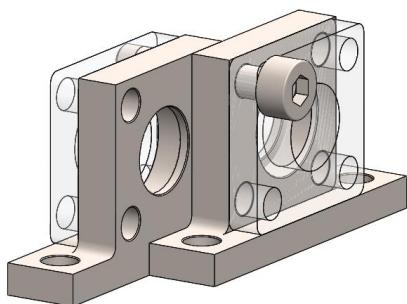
Combined bearing housings for rear axle and intermediate shaft. (All other components hidden for clarity)
